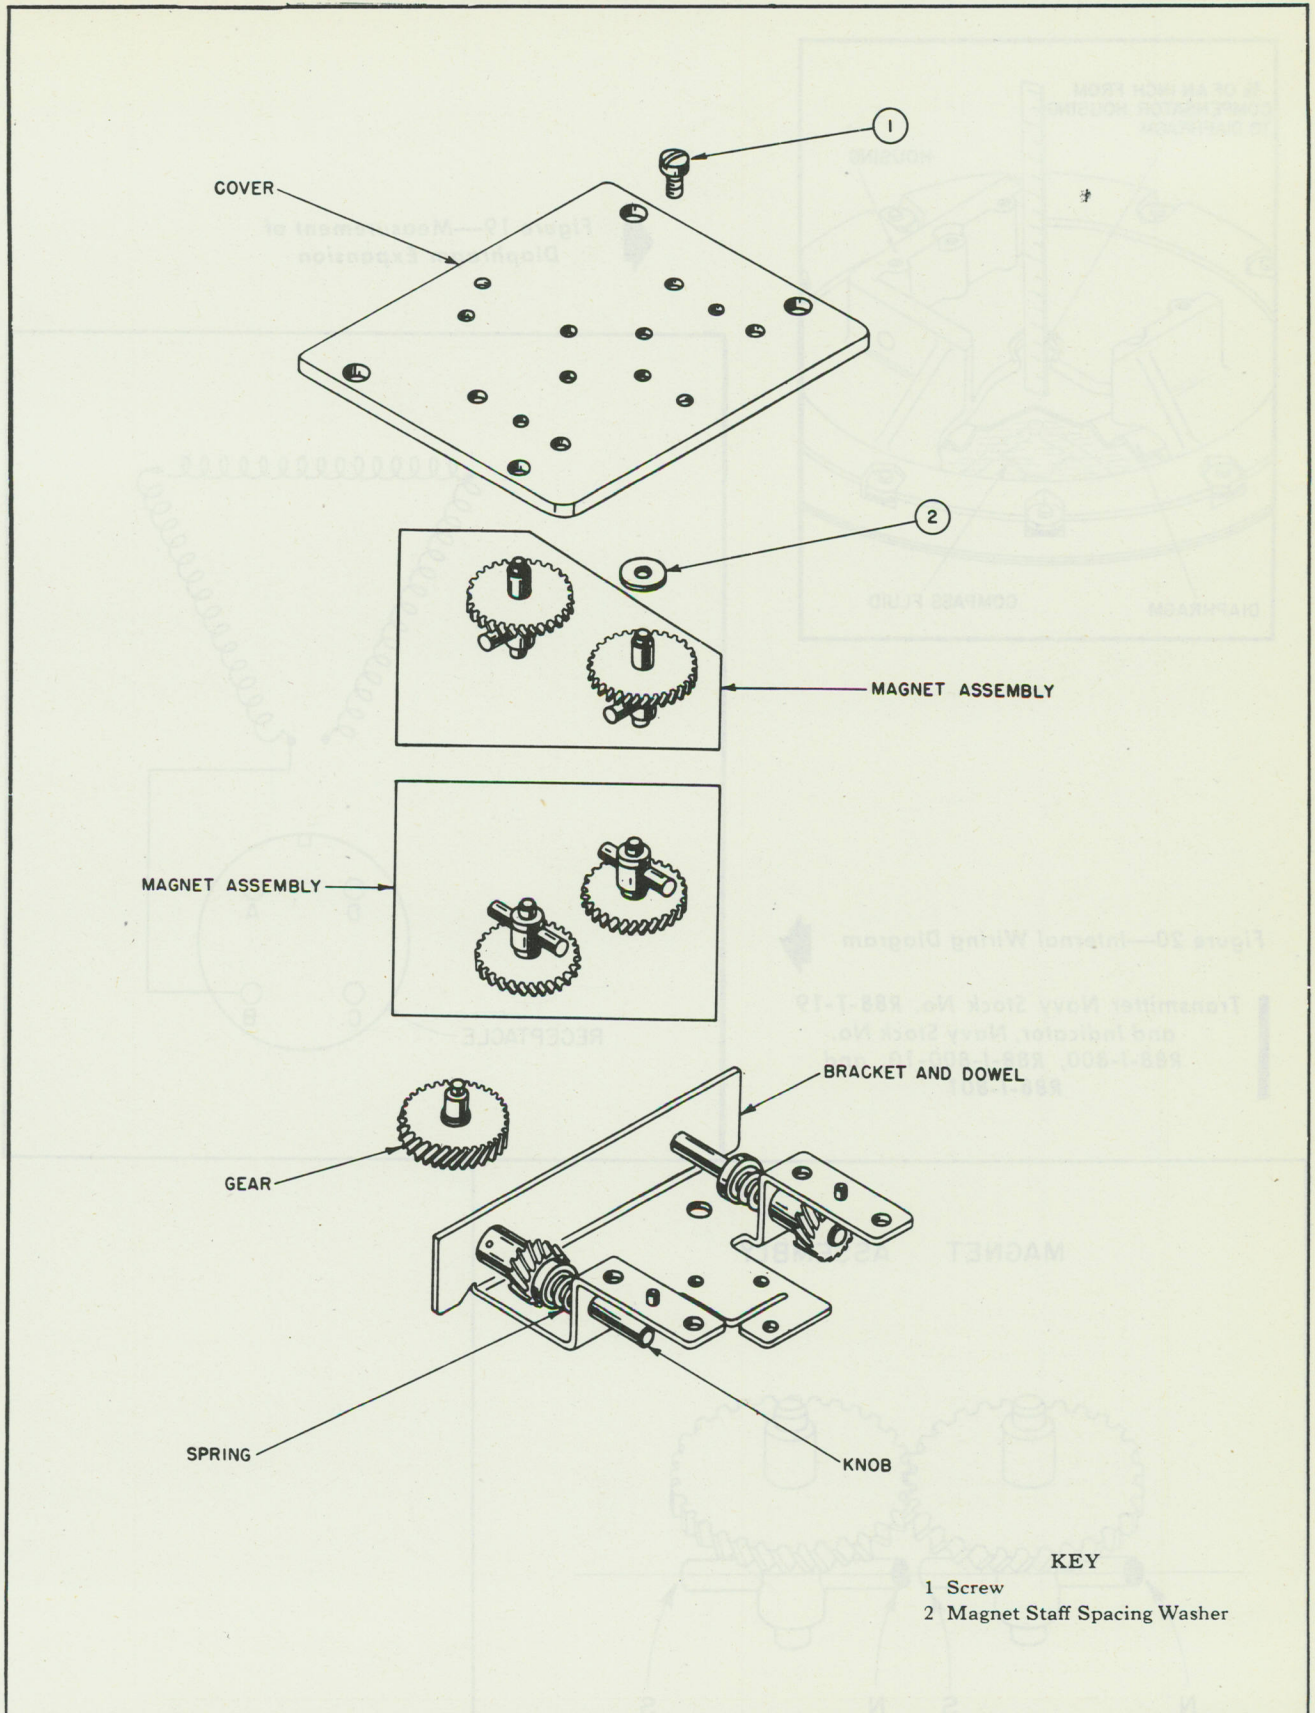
Exploded View Drawing—Compensator Assembly—Transmitter—Type AN 5730-3
